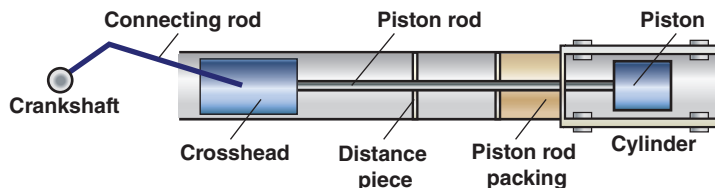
Reciprocating compressors compress air or other gases using a piston that is driven by a crankshaft. Shown here are the main parts of a reciprocating compressor
